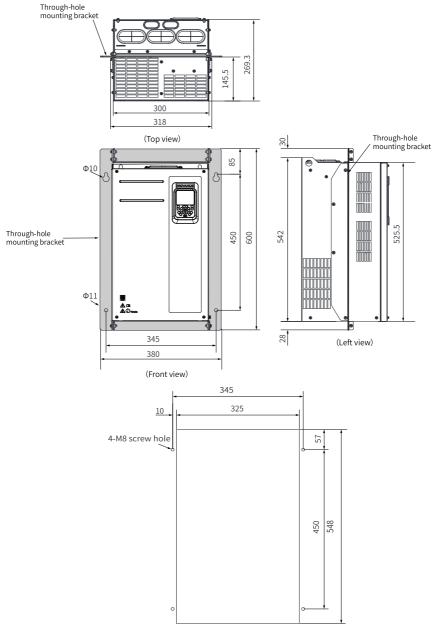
MD500-AZJ-A1T5 through-hole mounting bracket and cut-out dimensions (mm)
